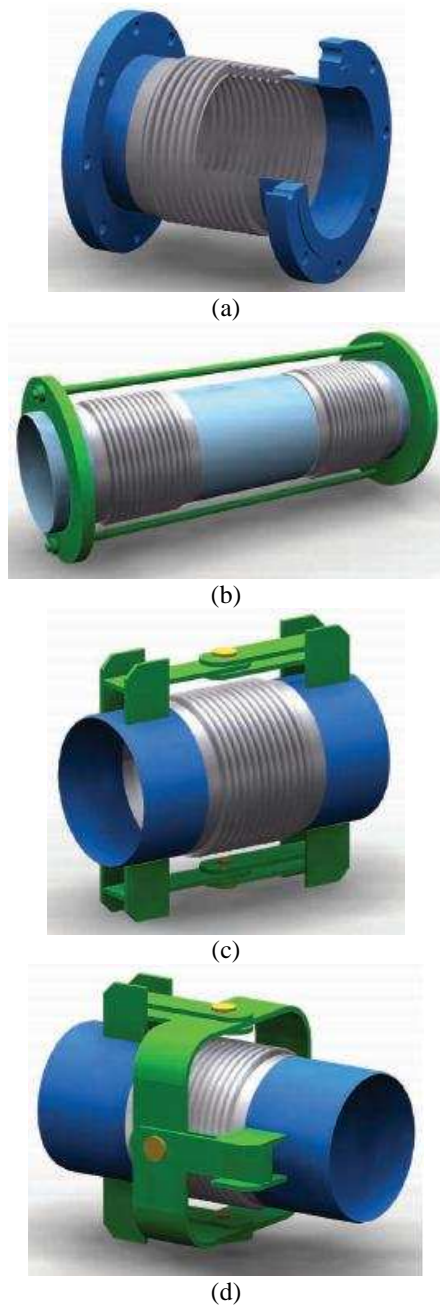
Expansion joints types. (a) Axial, (b) tied universal, (c) hinged, (d) gimbal.
